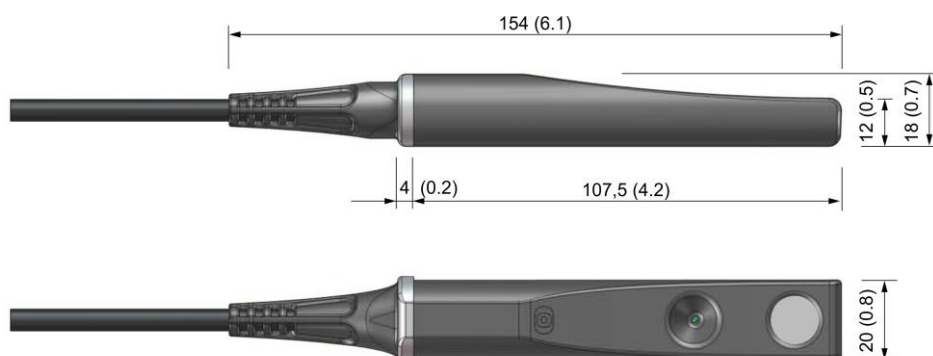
Dimensioner/Dimensionen/Dimensions Dimensiones mm(inch)
